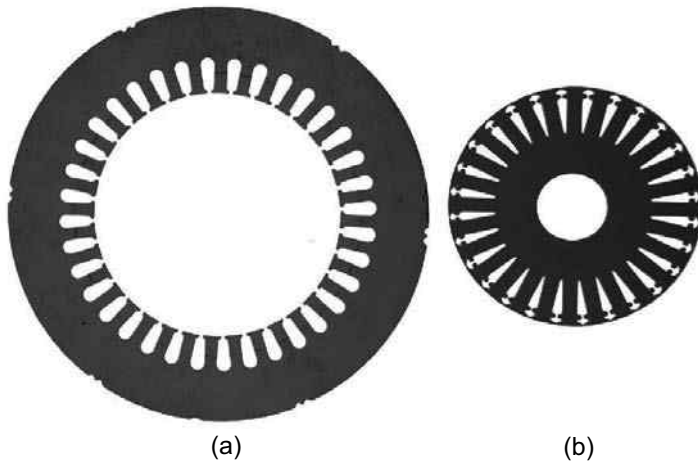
Laminated sheets for an IM: (a) stator and (b) rotor.
